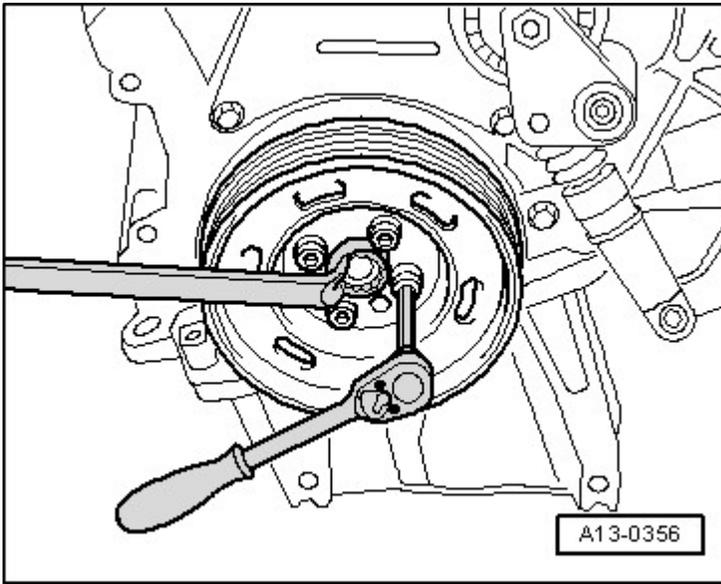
Identifying Removal/Installation Vibration Damper/Belt Pulley
